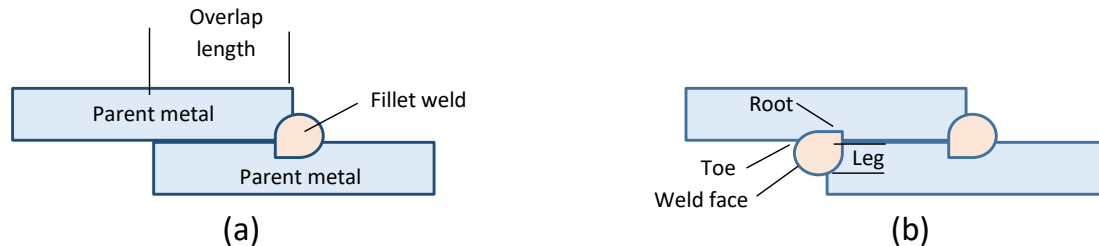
Lap Fillet Weldments: (a) Single Fillet-Single Pass, (b) Double Fillet-Single Pass.
